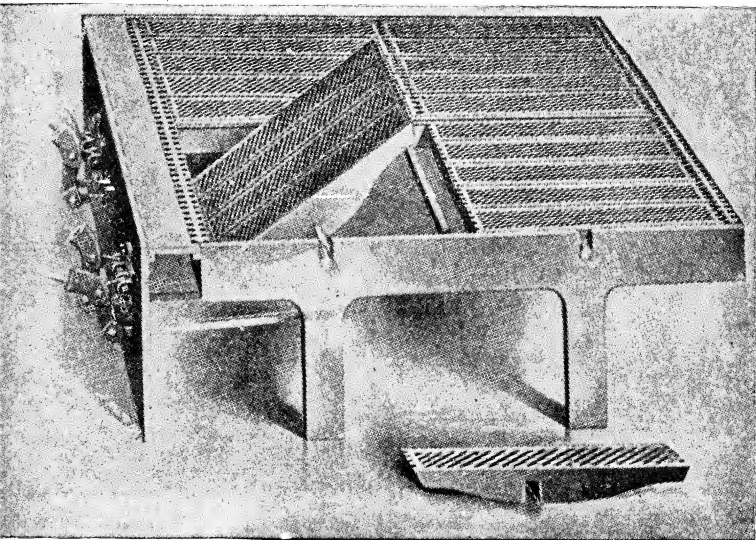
,289 and 4,290.—Manhattan rocking grate and detail of bar. *In construction* each section or bar has an arm projecting downward and pivoted to a horizontal bar which in turn is connected to the vertical shaking lever seen at the left. Moving the shaking bar back and forth causes the grate bars to "shake" or rock through a small angle, thus allowing ashes to fall through to the ash pit.
